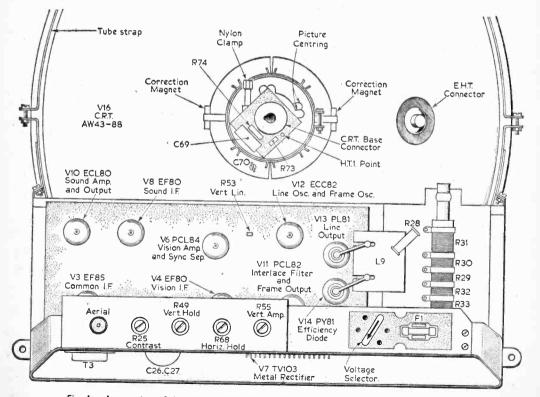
A rear view of the receiver showing the positions of some of the larger components.
